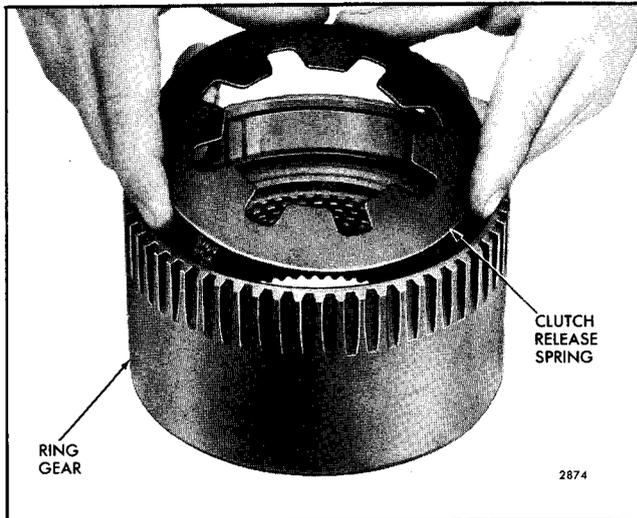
Installing Forward Clutch Release Spring in Ring Gear
